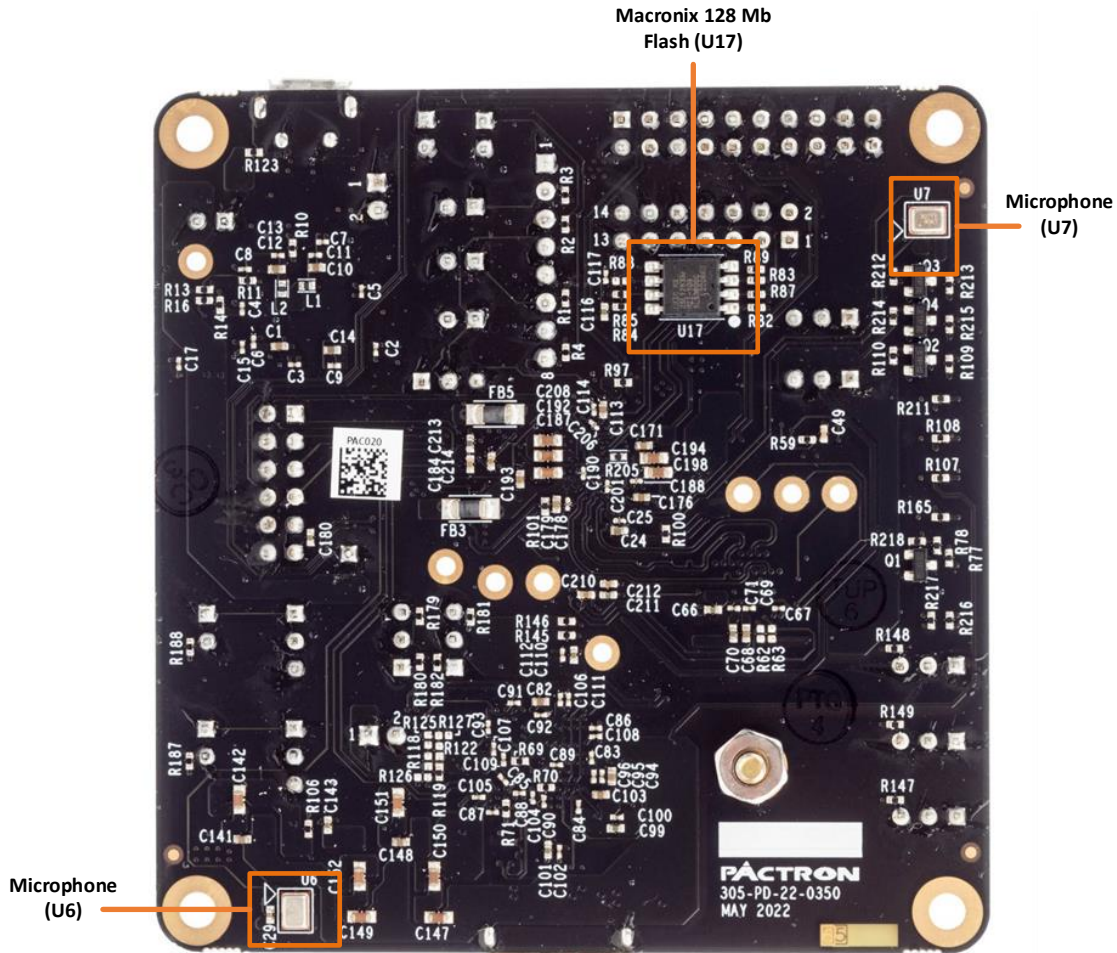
Bottom View of CrossLink-NX-33 Voice and Vision Machine Learning Board
